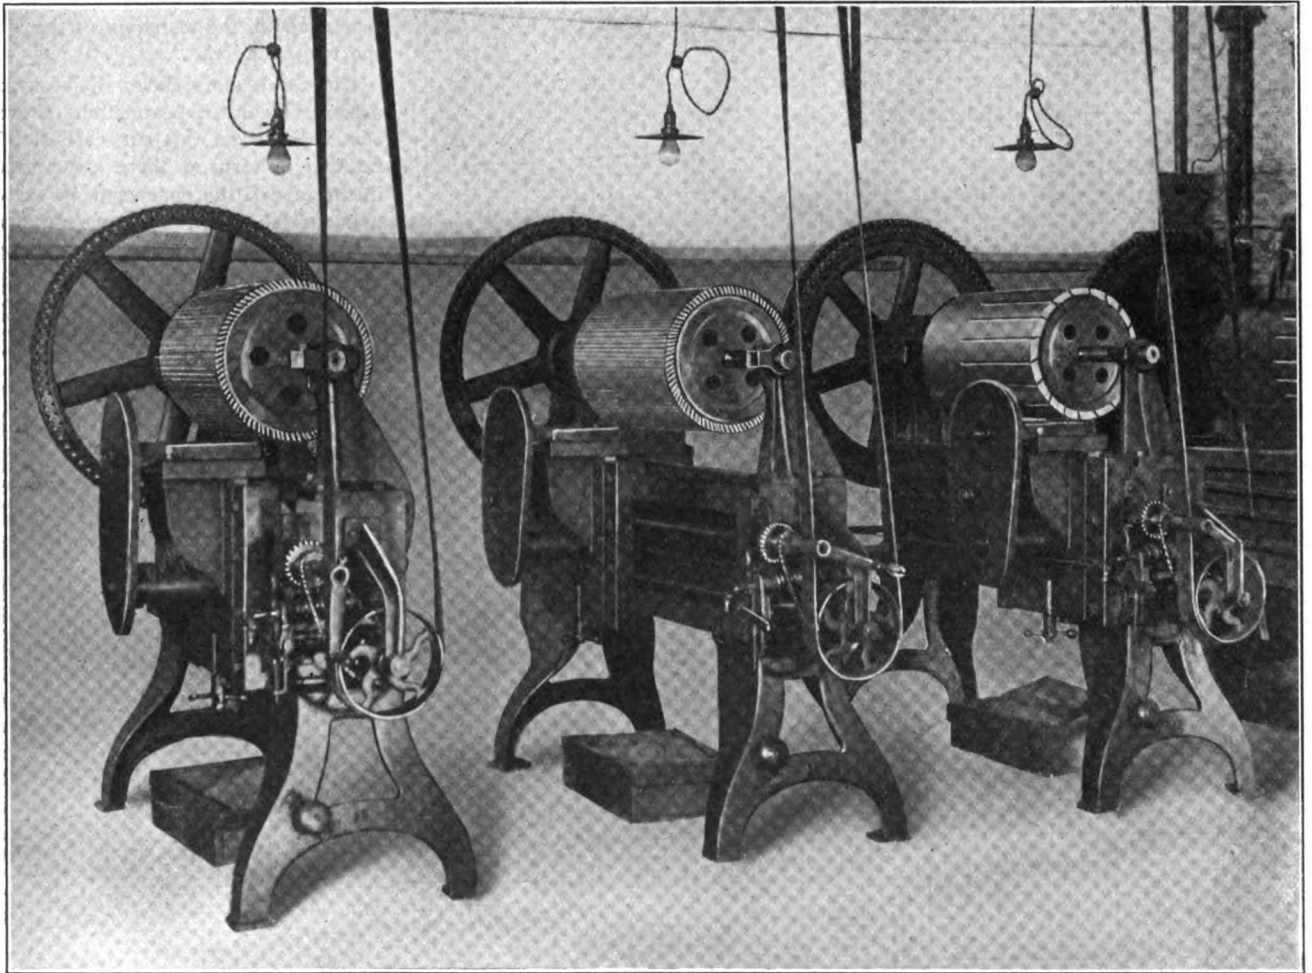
GROUP OF SPECIAL MACHINES FOR MILLING CHANNELS IN TYPE SETTER CYLINDERS
